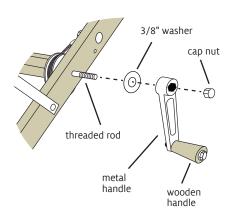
ATTACHING WARP BEAM CRANK HANDLE
